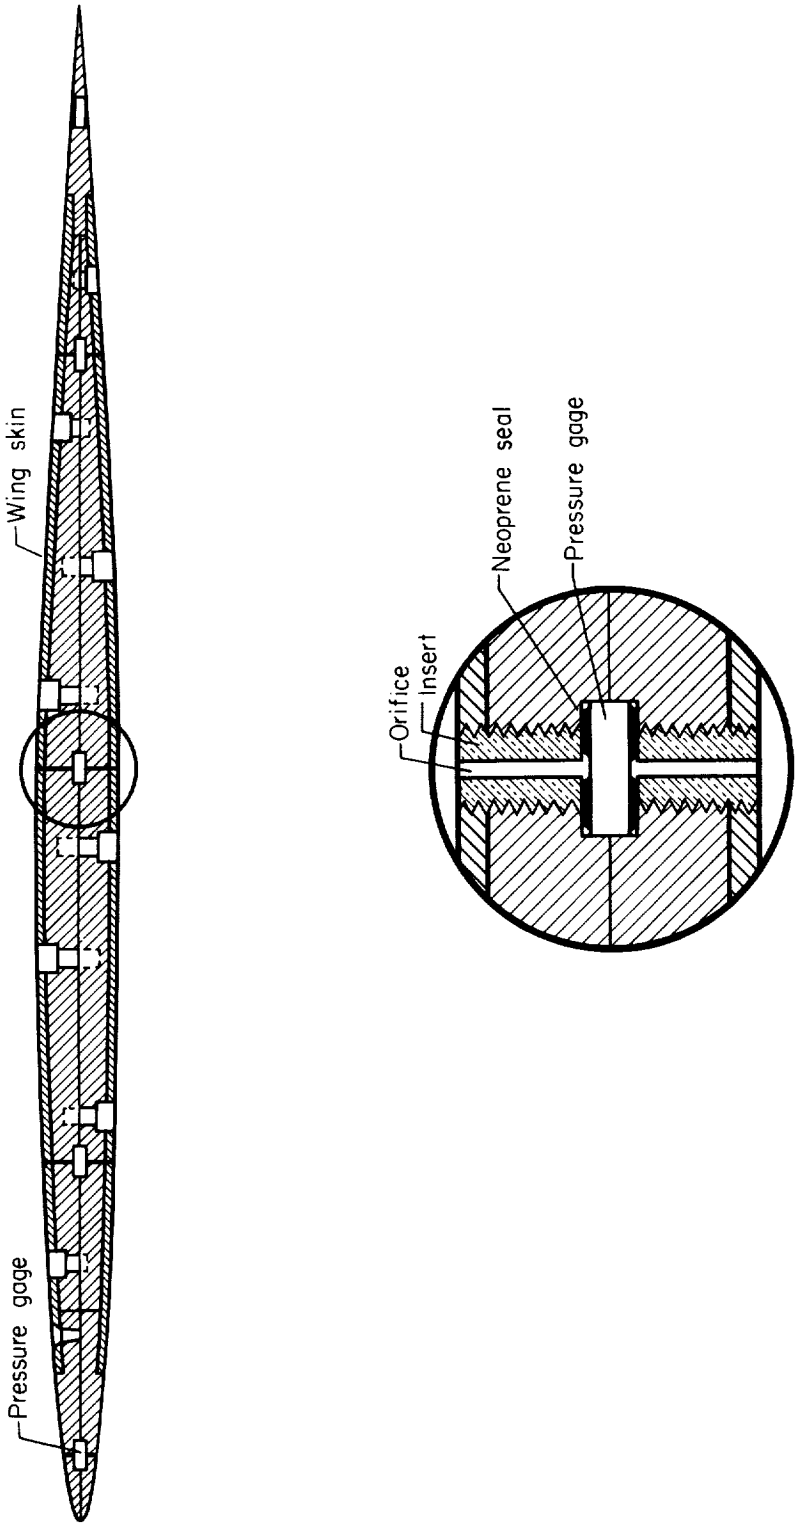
Sketch of cross section of wing and pressure-gage installation.
